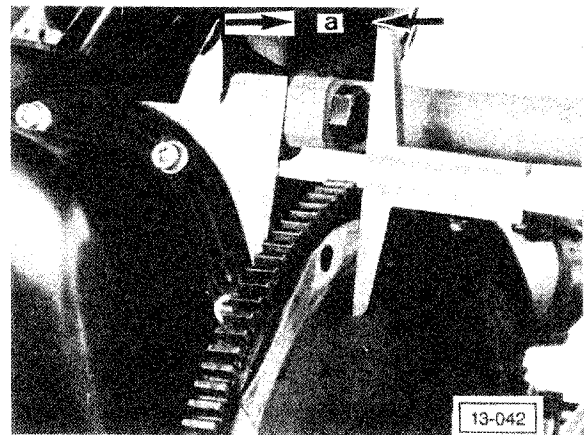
Drive plate to cylinder block clearance being measured. Dimension a should be 31.3 ± 0.7 mm (1.23 ± 0.028 in.). Adjust distance by adding or removing shims behind drive plate.
